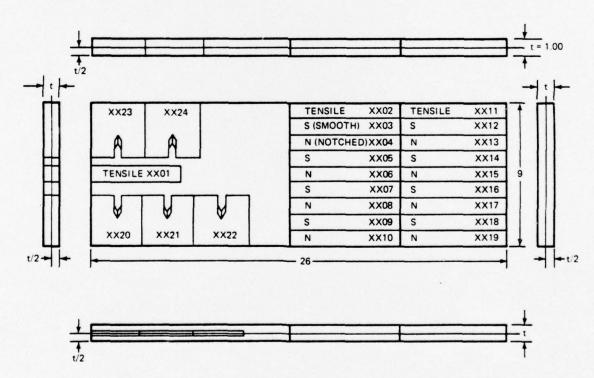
, A2, and A3 indicate forging dimensions and define the sequence of events for producing the final sections used to fabricate test specimens.
